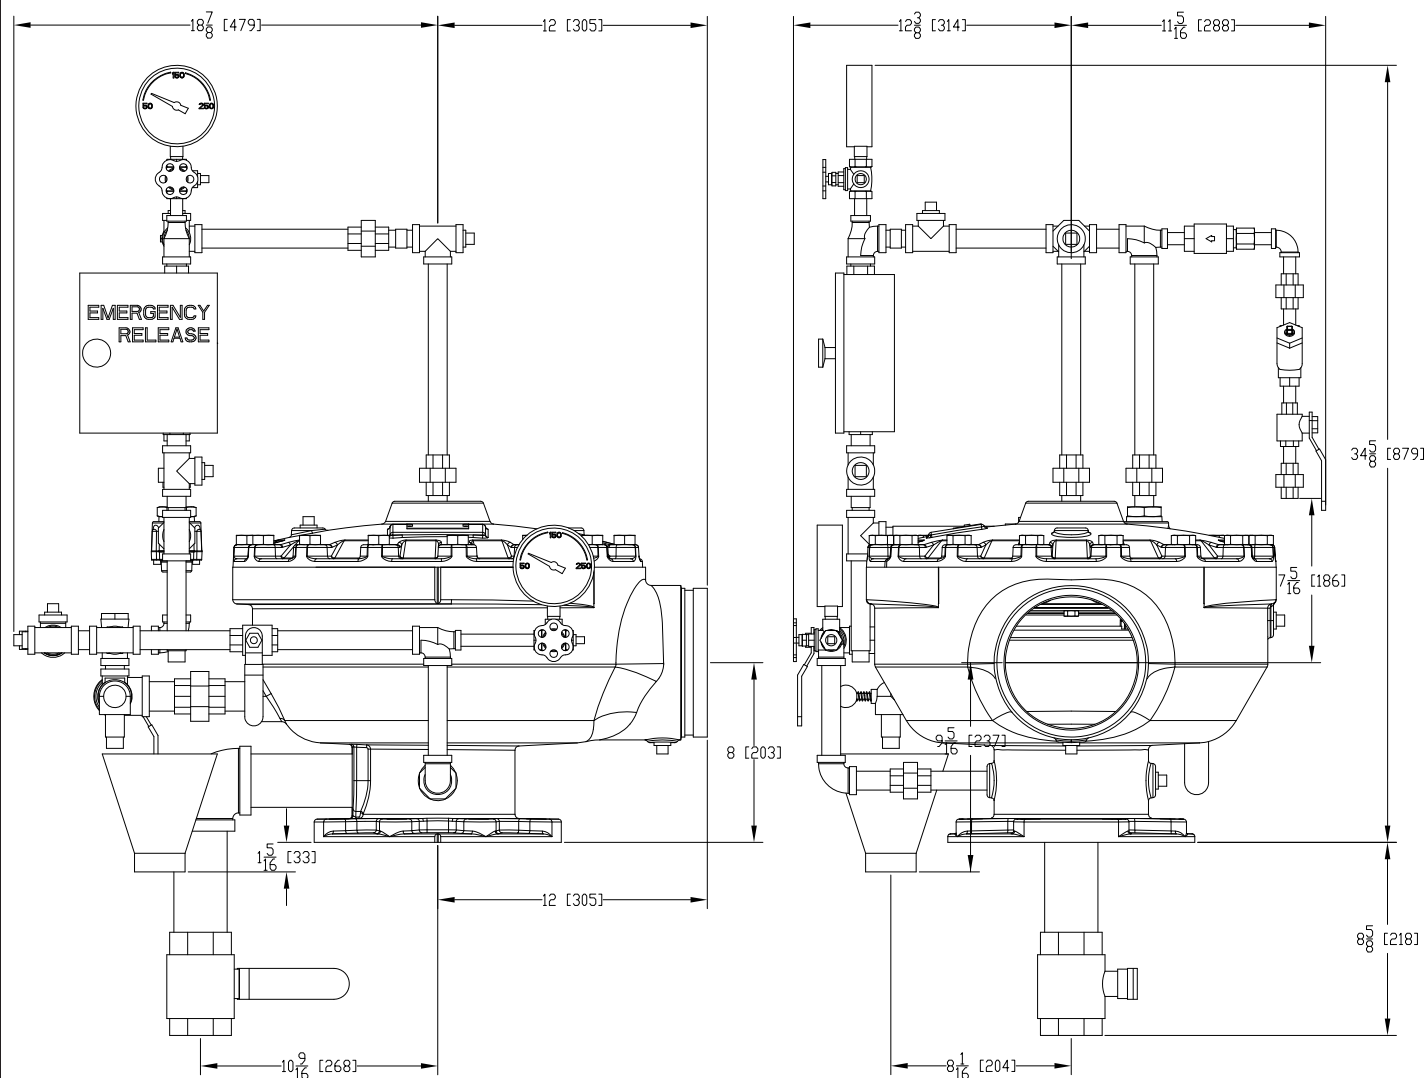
Installation Dimensions - 4" (DN100) Valve
